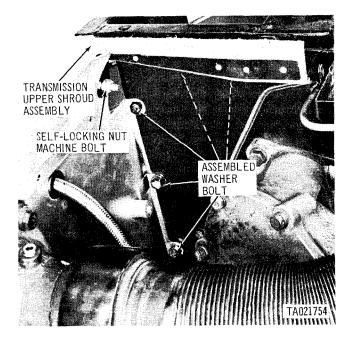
Disconnecting or connecting oil cooler support frame, model AVDS-1790-2C engine.
